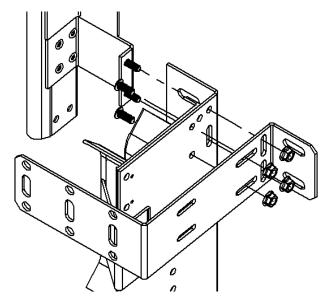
Attaching Upper Mounting Rail Assembly to Mounting Rail
